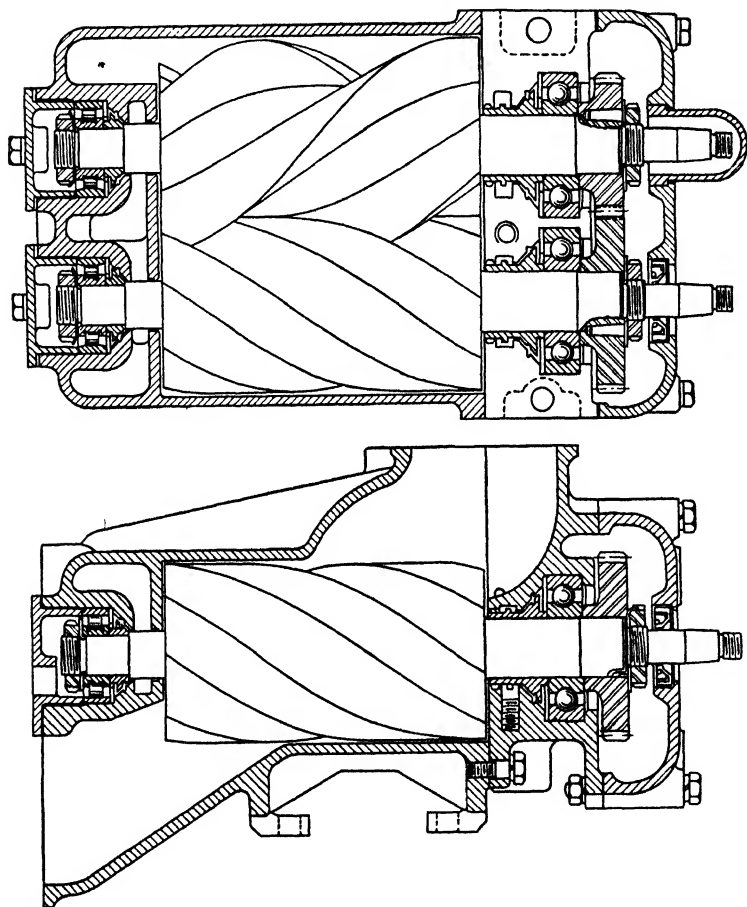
TWO SECTIONAL VIEWS OF ELLIOTT-LYSHOLM AXIAL-FLOW BLOWER.
